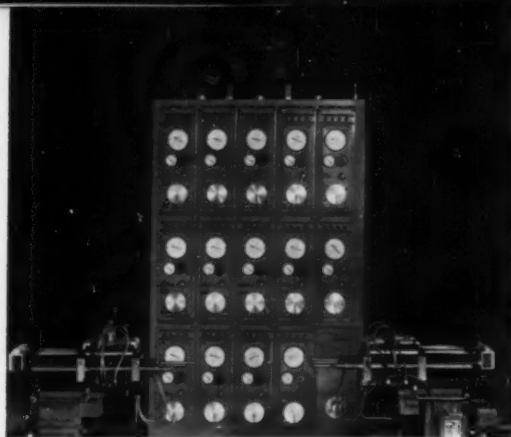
A complex "postprocess" gaging and control unit. This "modular" unit gages 13 separate dimensional characteristics, houses pneumatic and electronic controls for a boring machine. Both here and in the simpler device of Fig. 3, the module produces the signals necessary for control of the machine tool producing the part.
